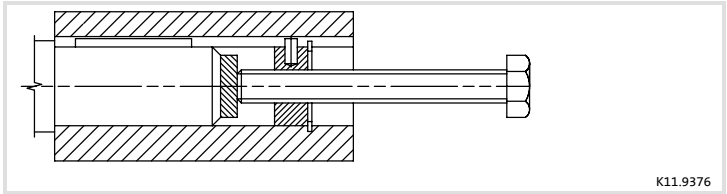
Puller for spring-loaded pulleys, type 11.213.10 without flange
